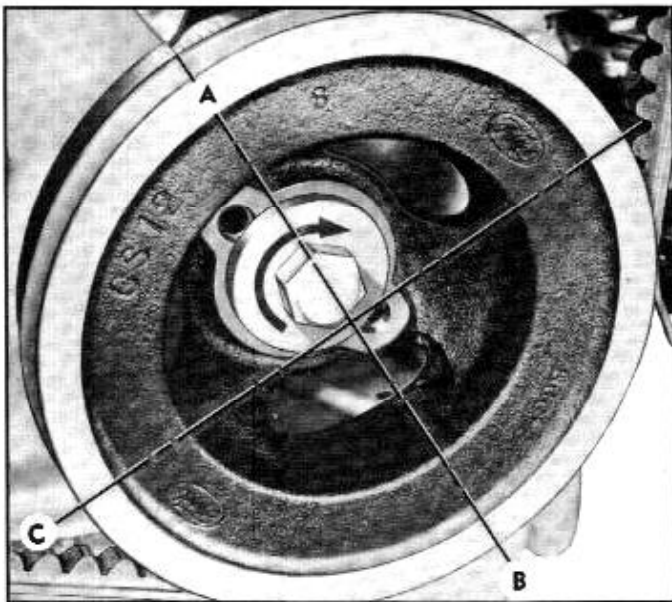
C-72—Quadrant for Valve Clearance Adjustment — Typical
